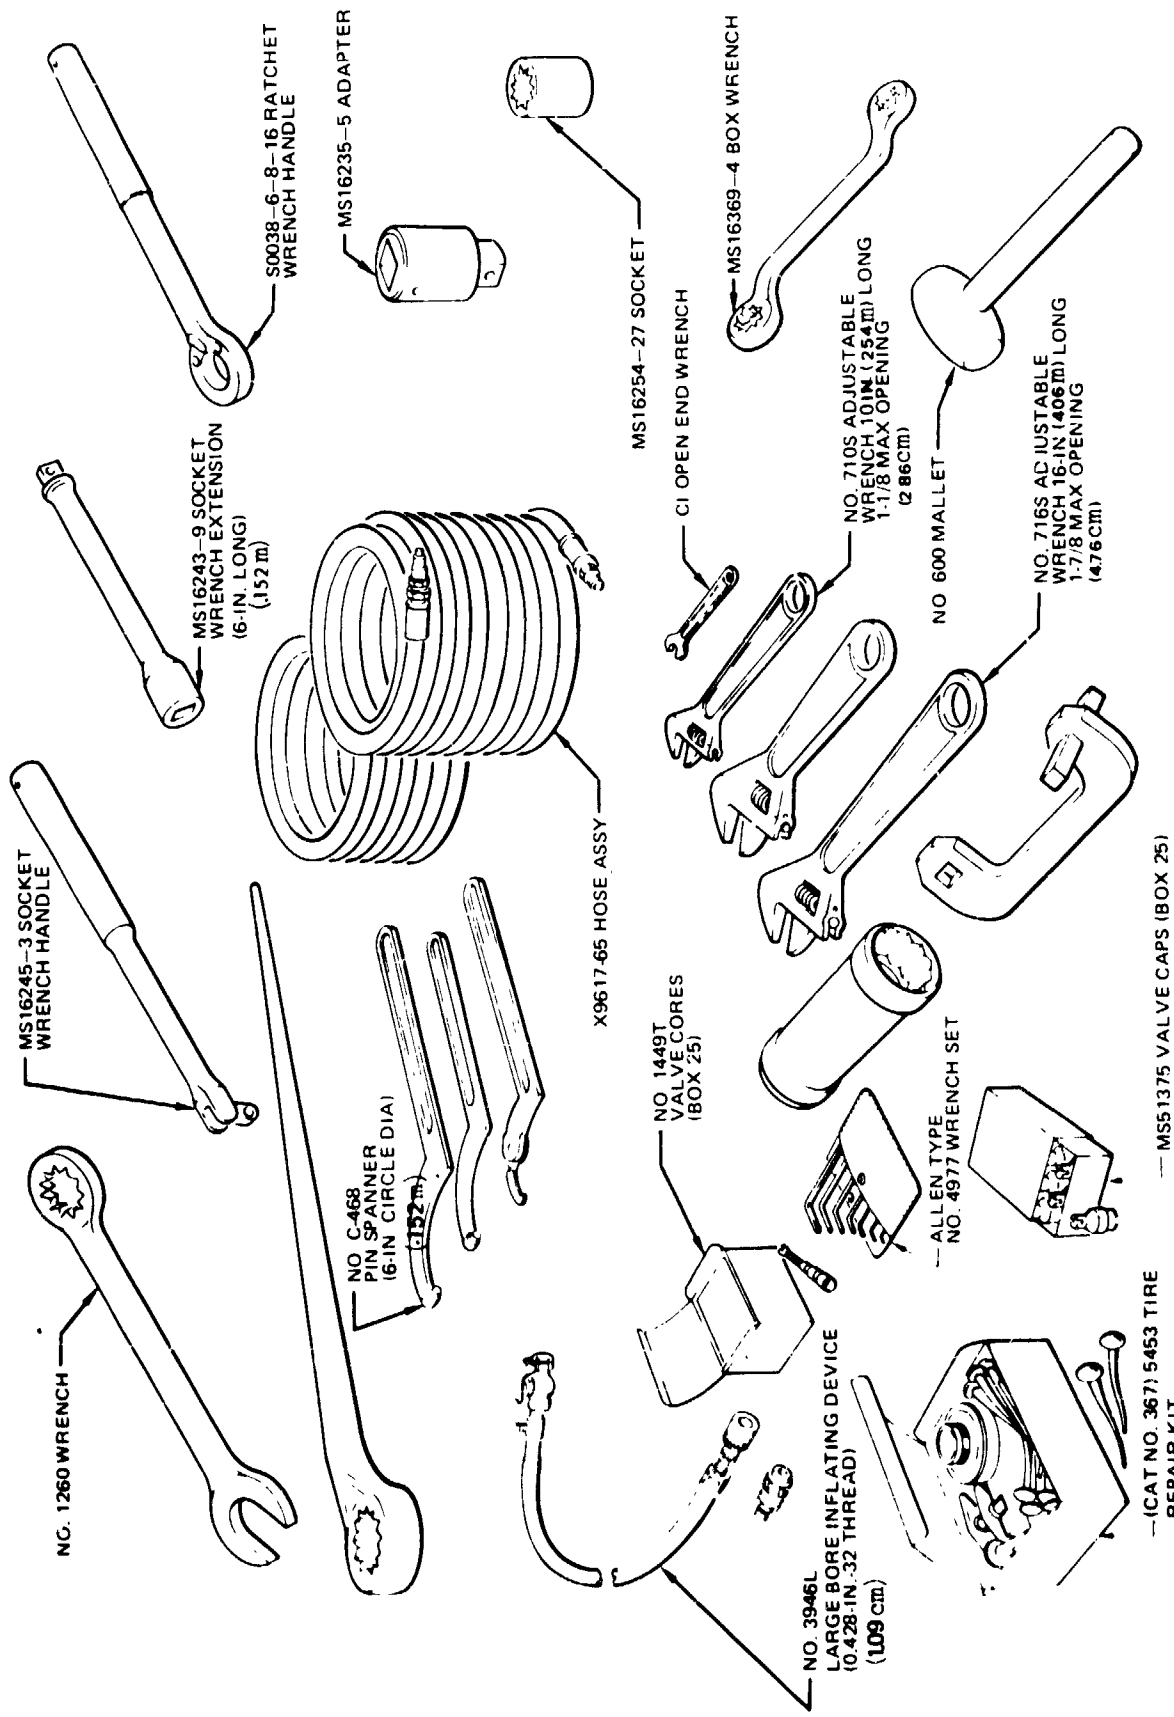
Special Tool Kit (DSV-4B-305)
